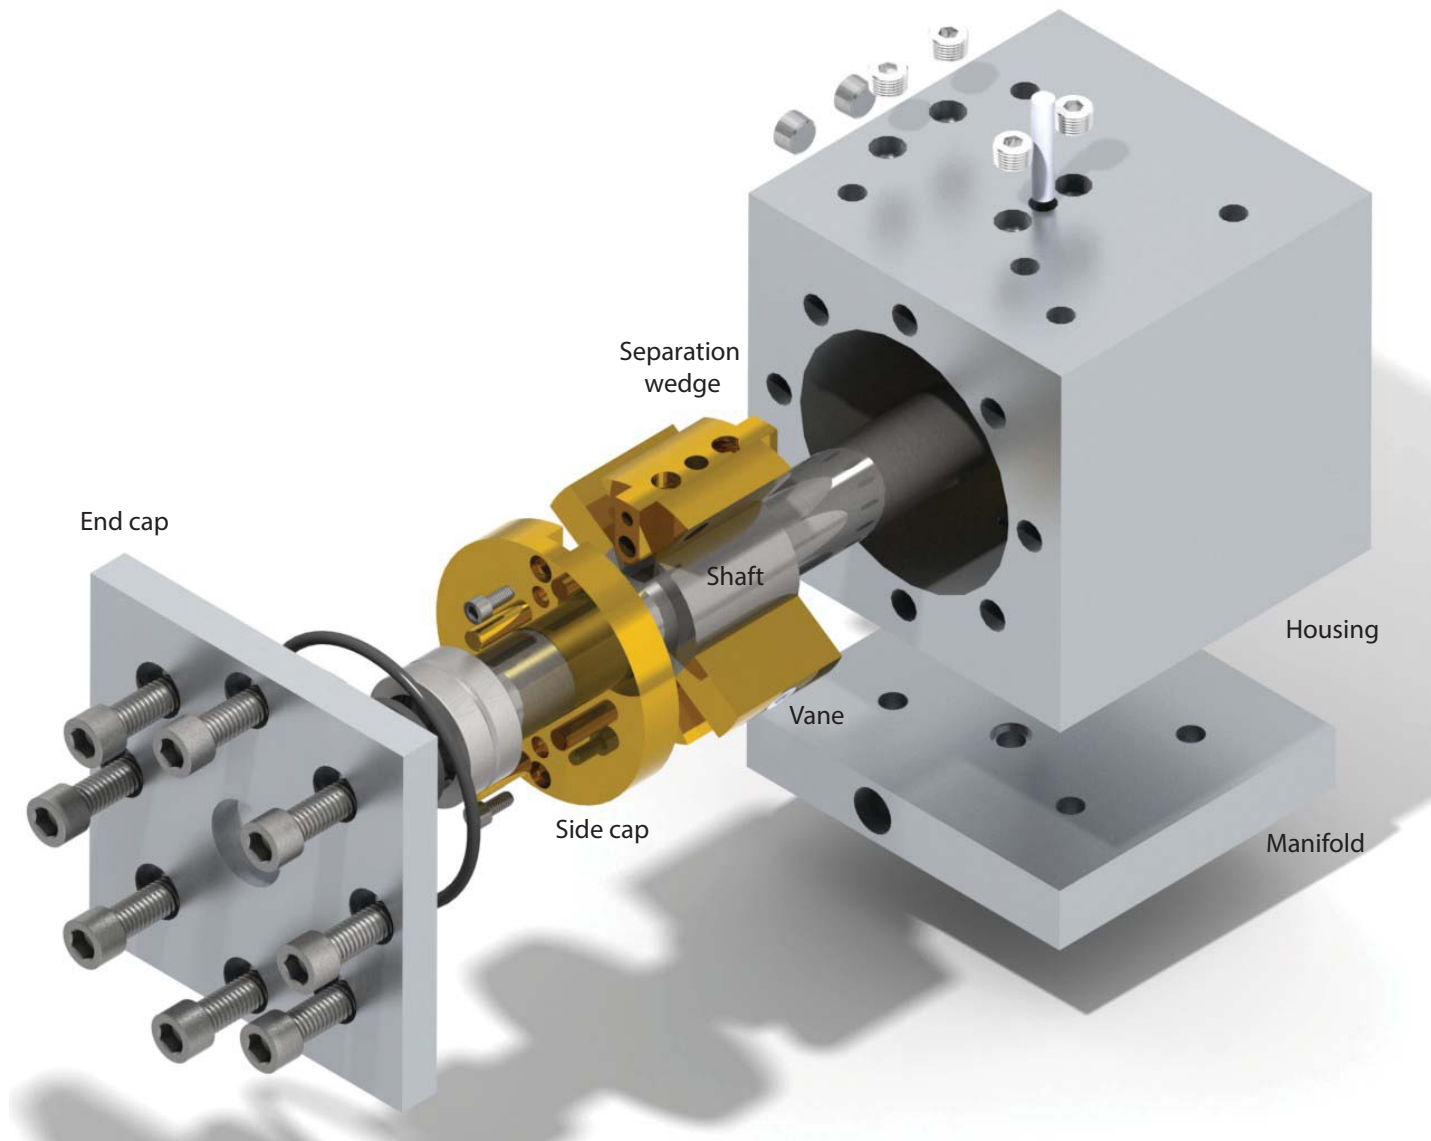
An exploded view of the proposed actuator in real view graphics
